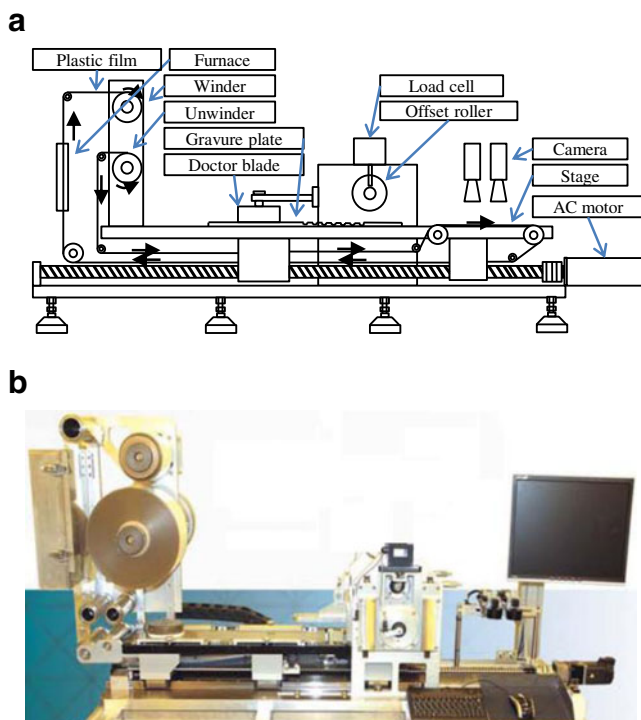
Roll-to-plate gravure offset printing equipment: a schematic diagram; b picture
